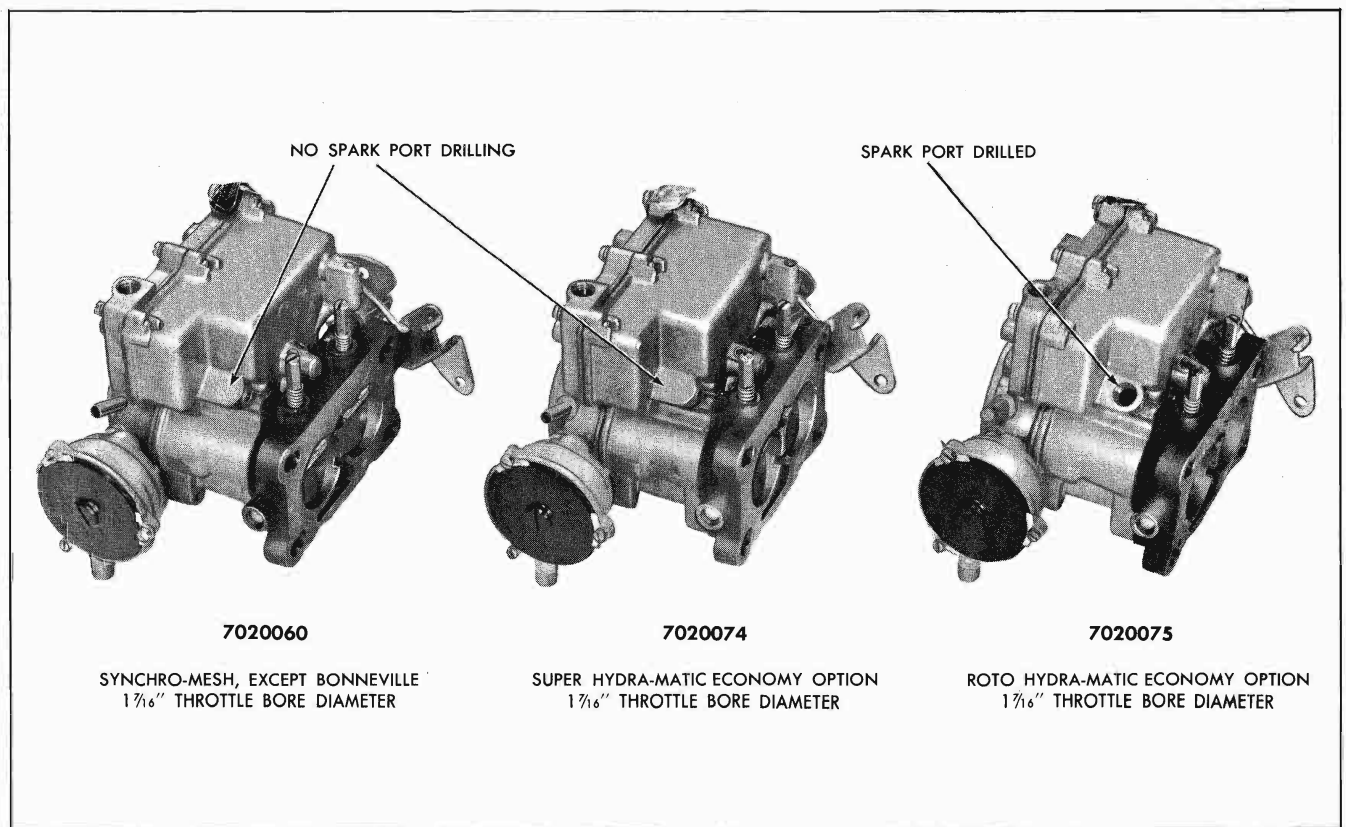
B-59 Comparison of 7020060, 7020074 and 7020075 Carburetors Showing Spark Port Drilling. 7020075 is Equipped with Throttle Return Check
